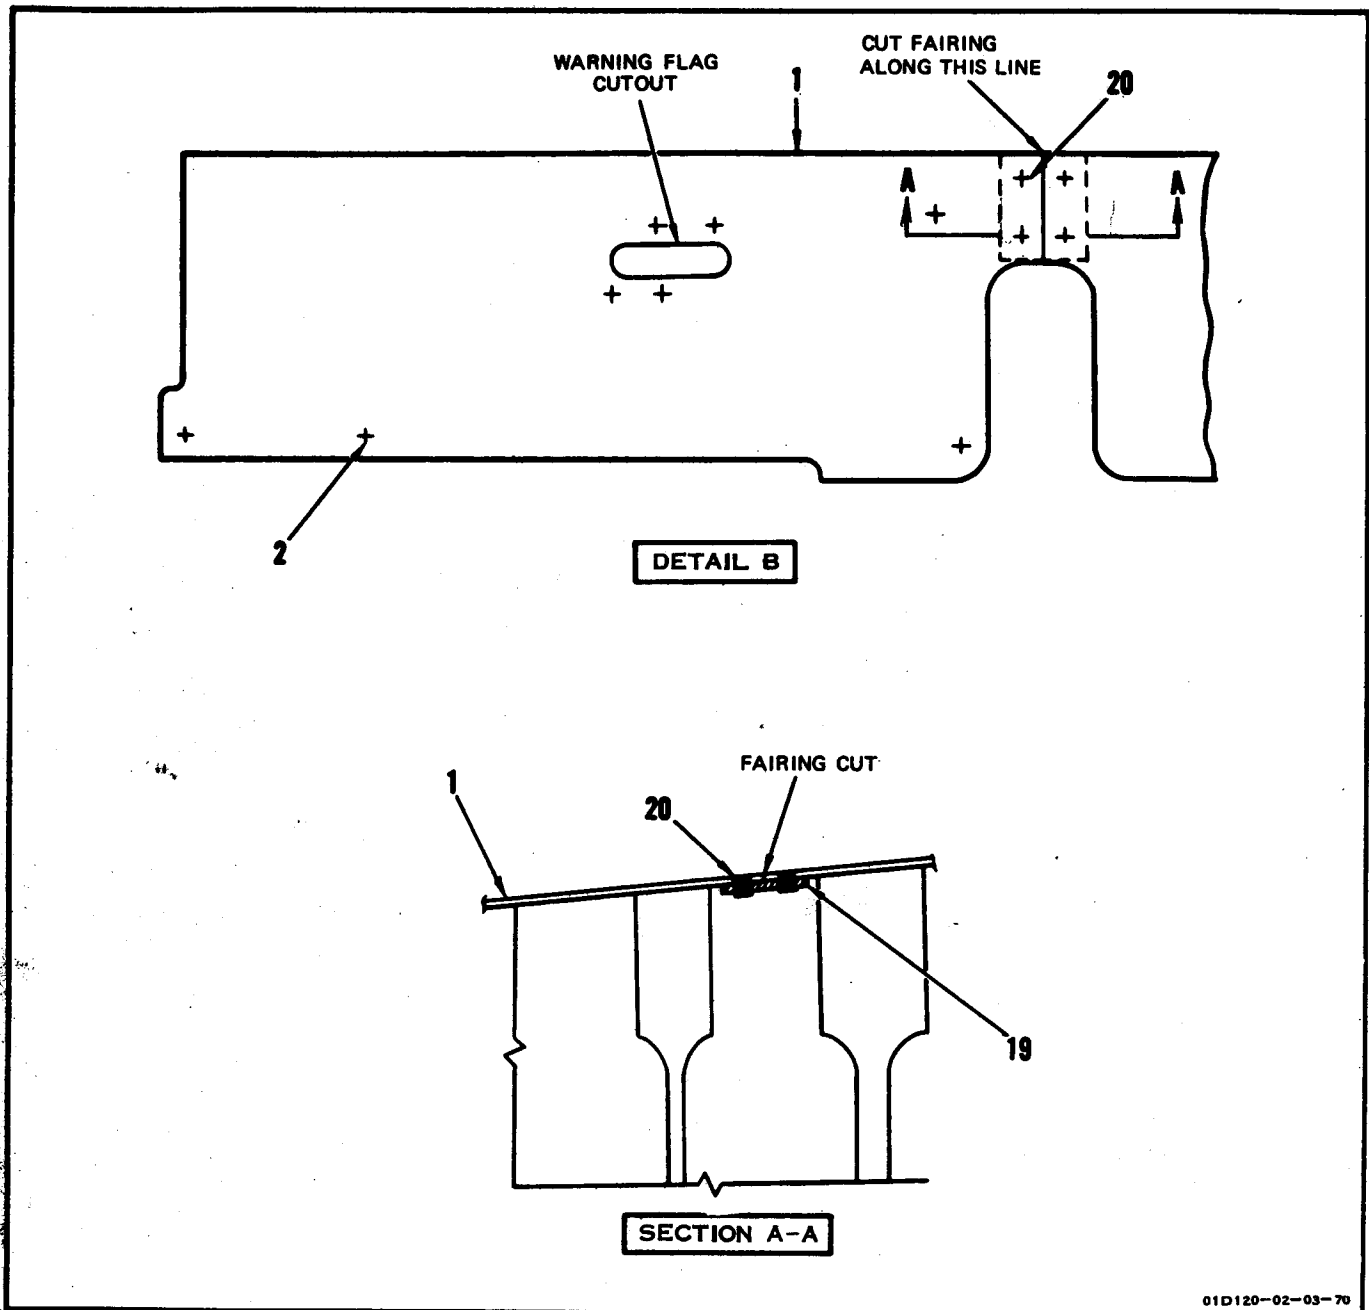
Outboard Pylon Removal with Wings Spread (Sheet 2)
